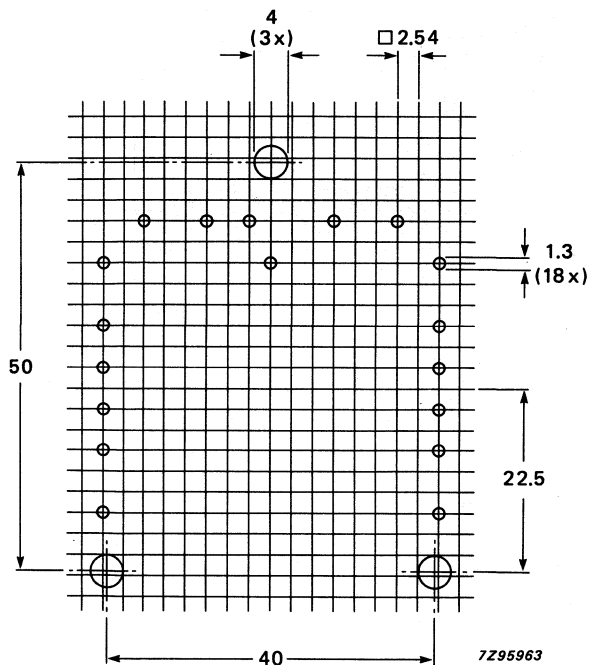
Hole pattern for mounting on a printed-wiring board (solder side).
